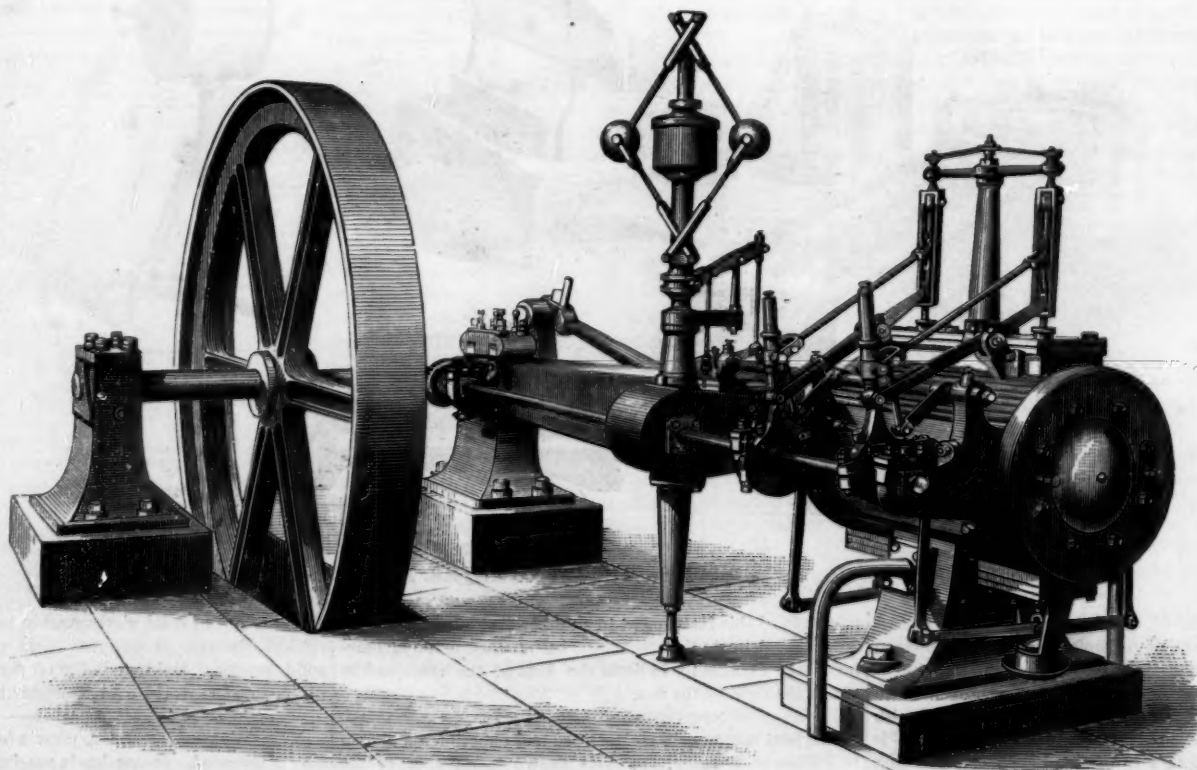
HORIZONTAL ENGINE WITH COLLMANN'S VALVE GEAR.
